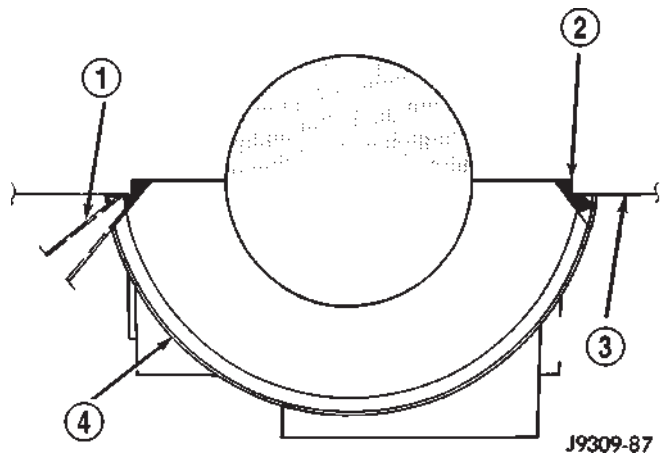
Apply Sealant to Bearing Cap to Block Joint
